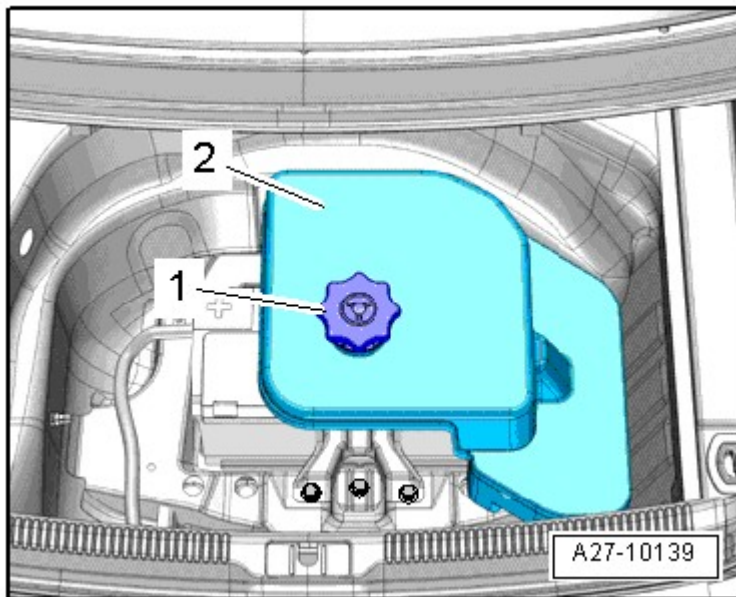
Identifying Nut -1- And Tool Kit Cover -2-
